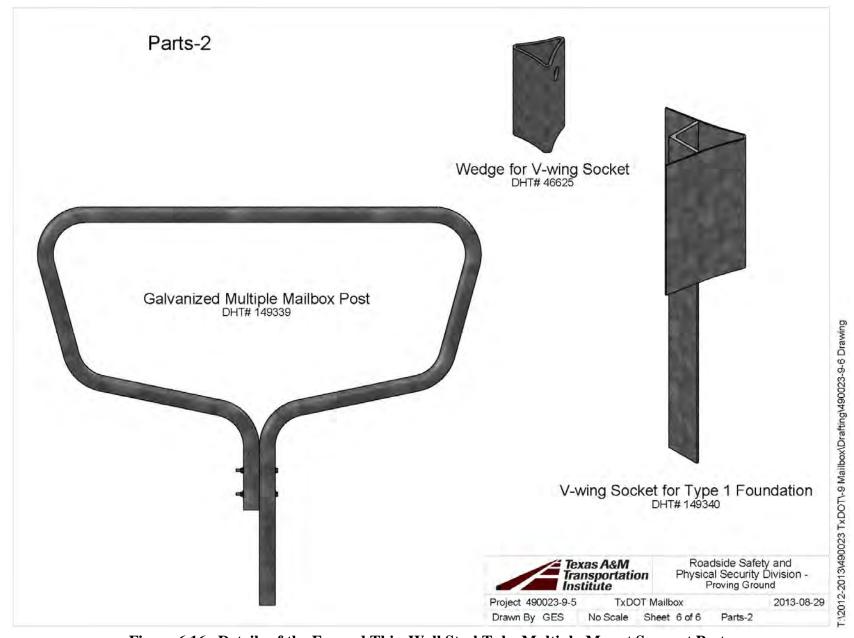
Details of the Formed Thin-Wall Steel Tube Multiple-Mount Support Post.
